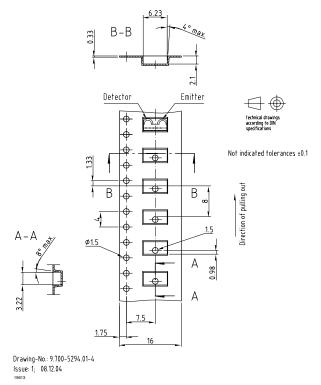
Tape for 1.9 - mm Package Side View Oriented
